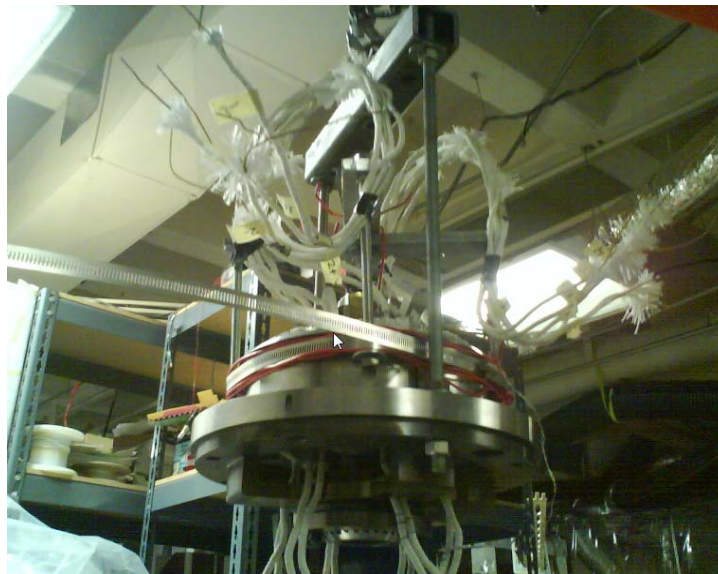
Bottom stator plate being lifted (after the bottom radial bearing was “picked and placed” on the bottom catcher bearing)
